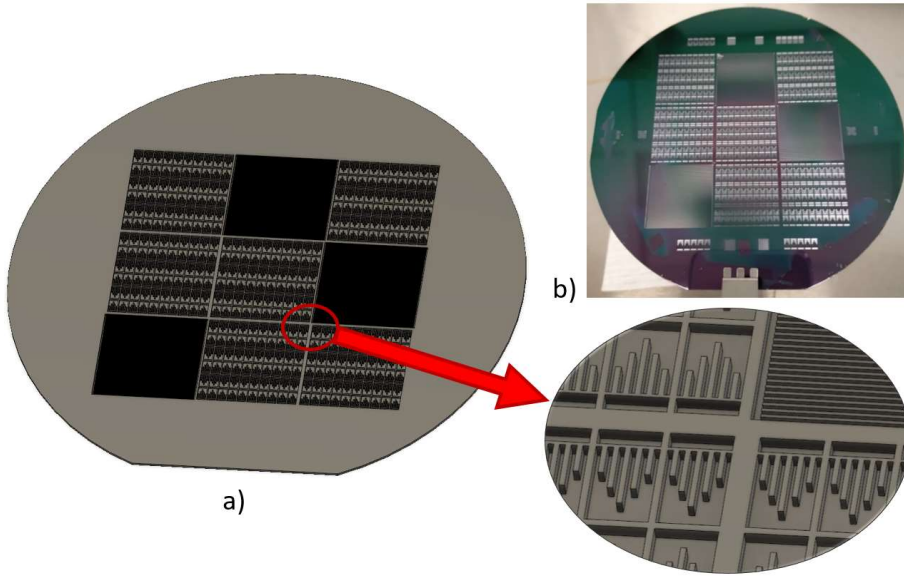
a) 3D model of the first wafer on the cooling geometries side, b) photo of the first wafer from the cooling geometries side
